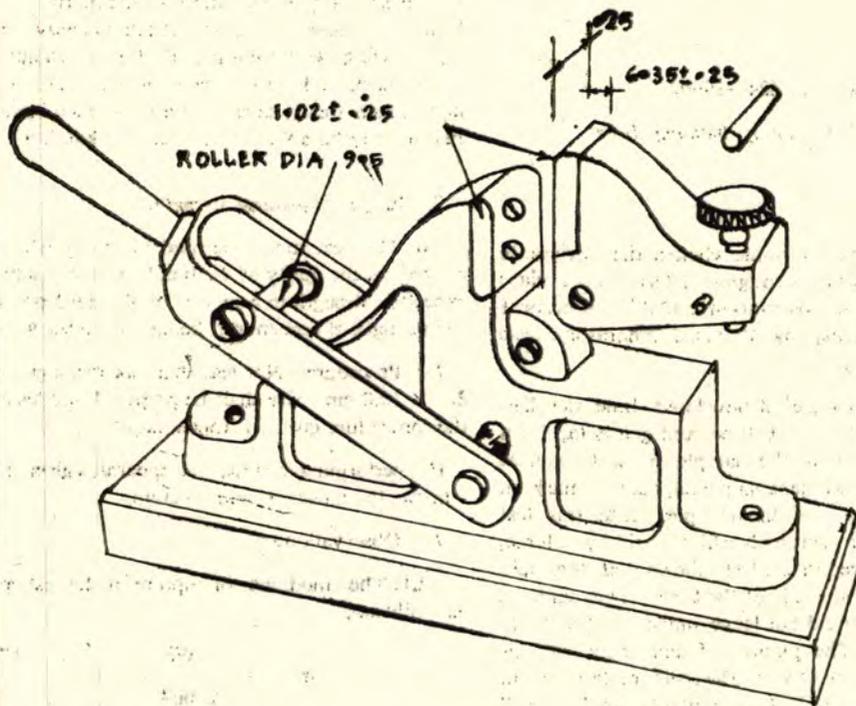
TYPICAL JENKINS BEND TESTING MACHINE
